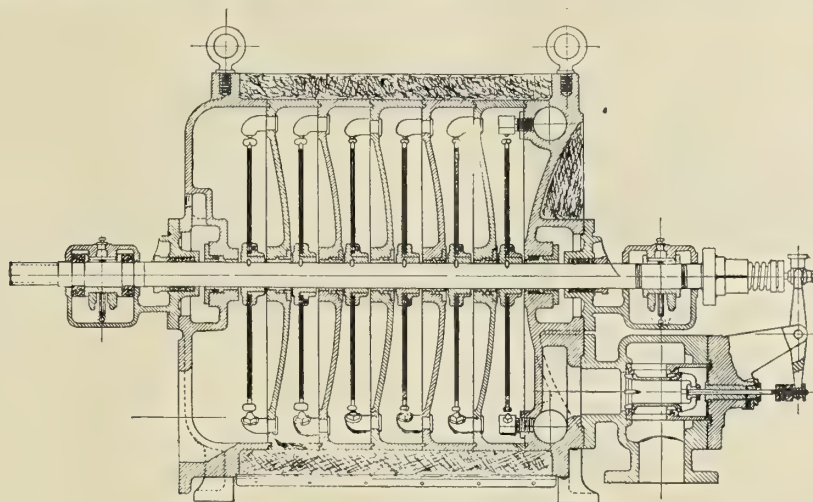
SECTIONAL VIEW OF KERR TURBINE
